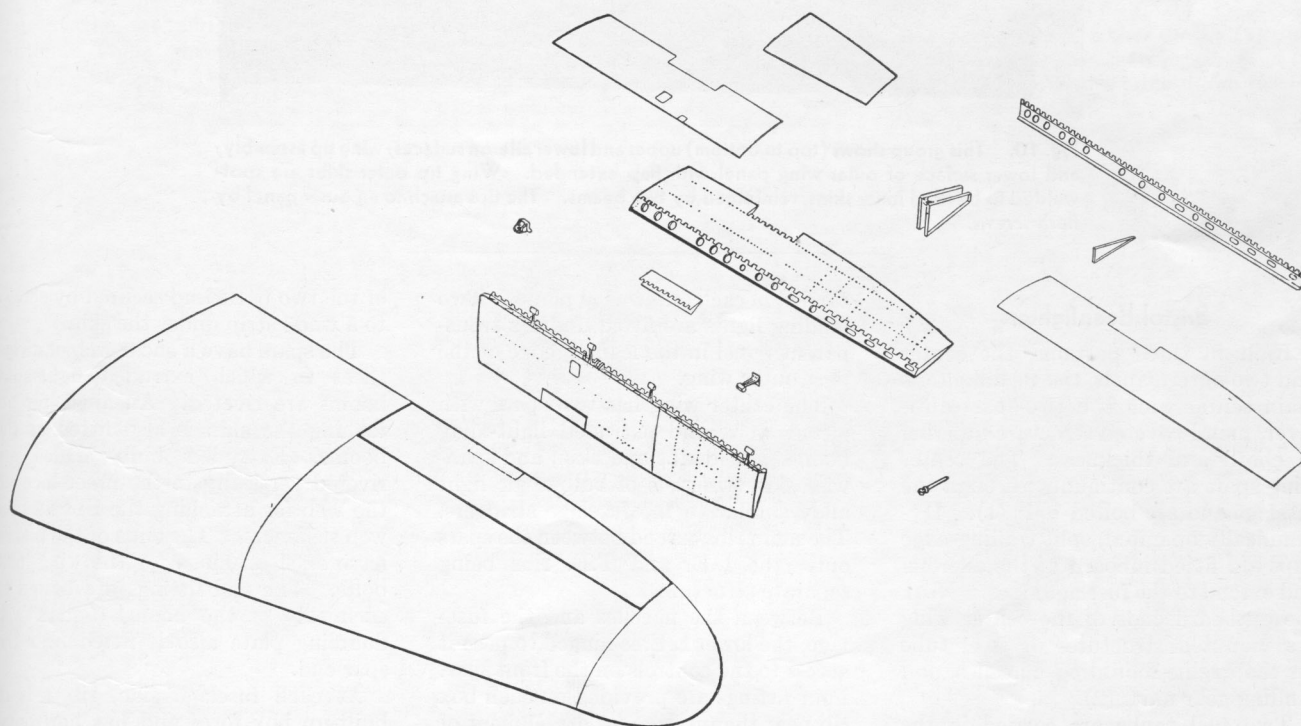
Exploded view of aileron components, showing a front beam (extreme right), around which the unit is built, typical ribs, upper and lower flush-riveted skin panels, and control counterweight details. Piano-type hinges are employed for attachment to the wing.
